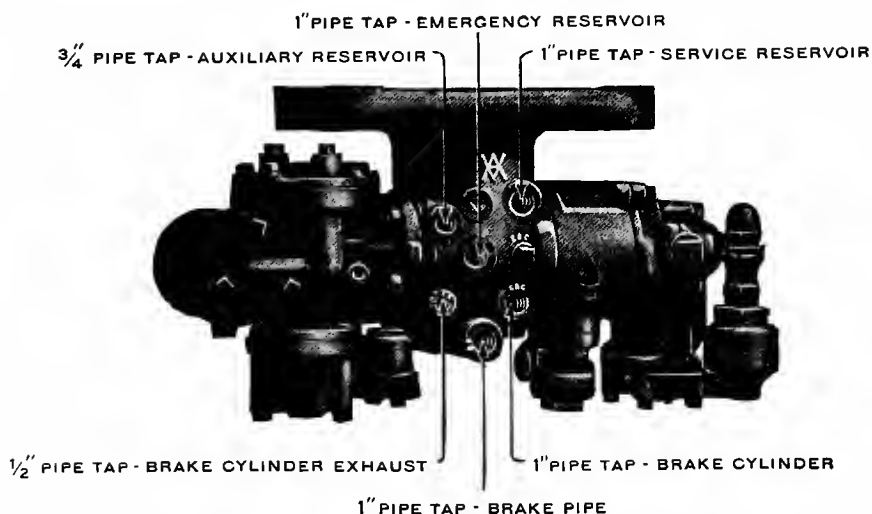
UNIVERSAL VALVE, UC EQUIPMENT
